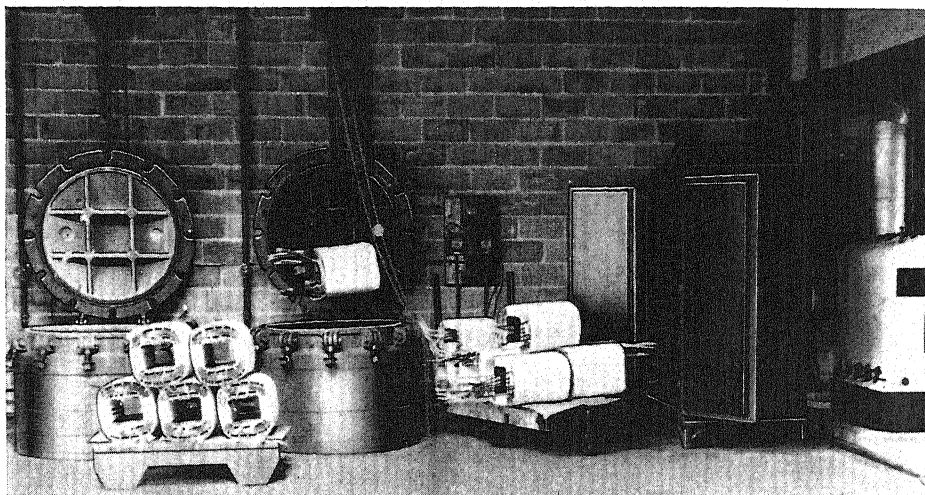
Transformer Coils Being Lowered into a Vacuum Impregnating Tank for Treatment with Baking Insulating Varnish.
